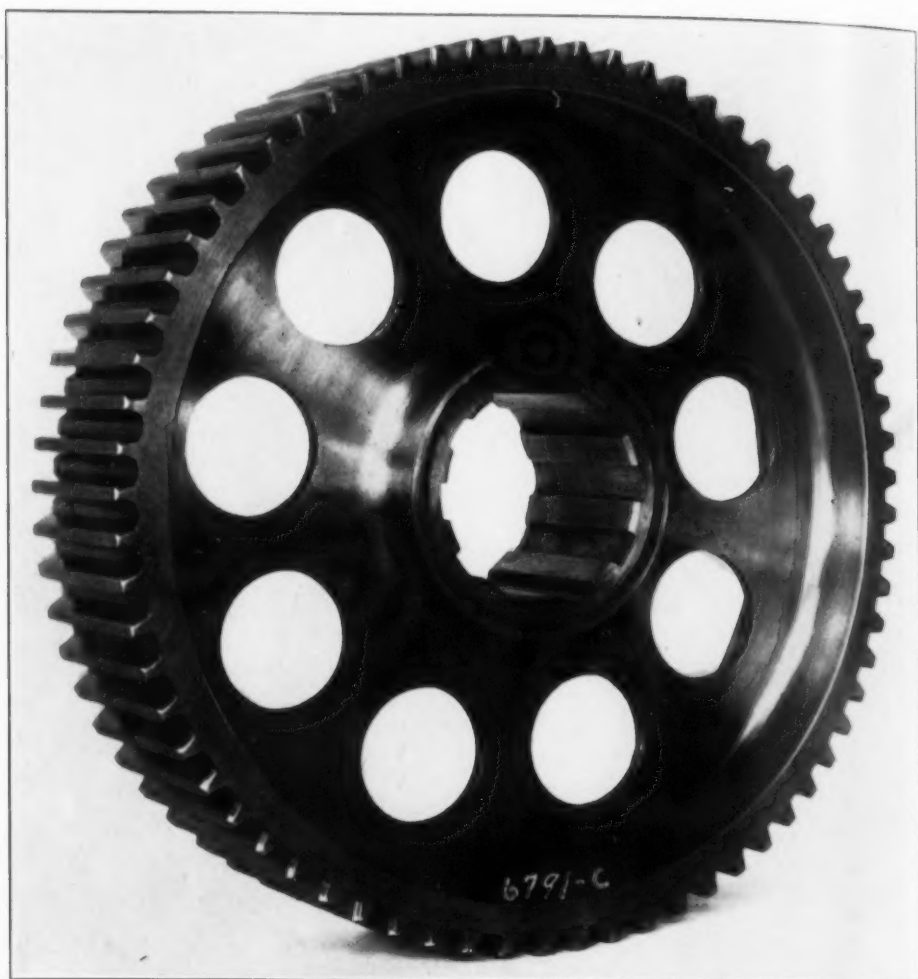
Photograph of Reduction Gear for Geared Propeller. (Greatly Reduced.)
